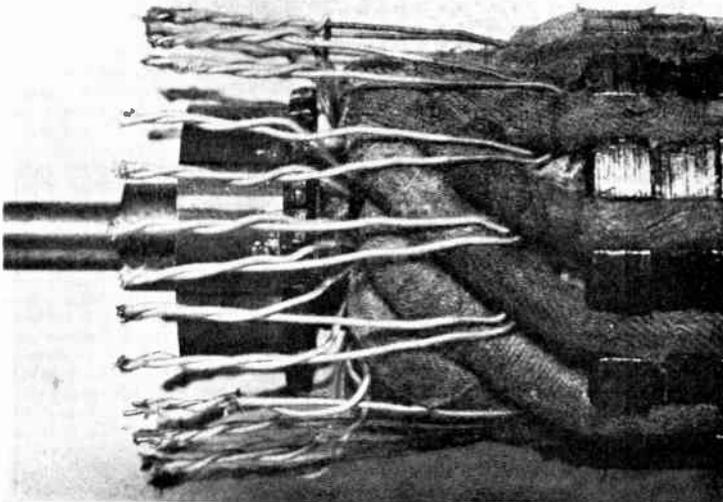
THE ARMATURE READY FOR SOLDERING. Showing the leads of the coils twisted in pairs and placed in order ready for soldering to the commutator.
